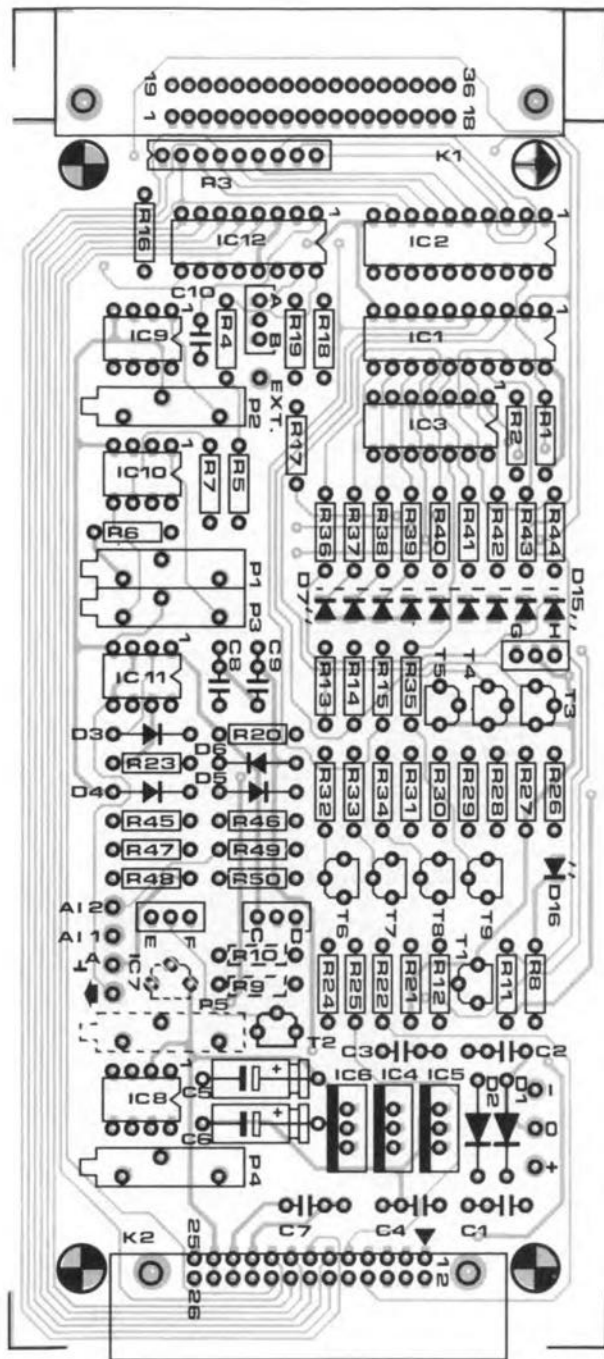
Component mounting plan of the double-sided, through-plated PCB.
